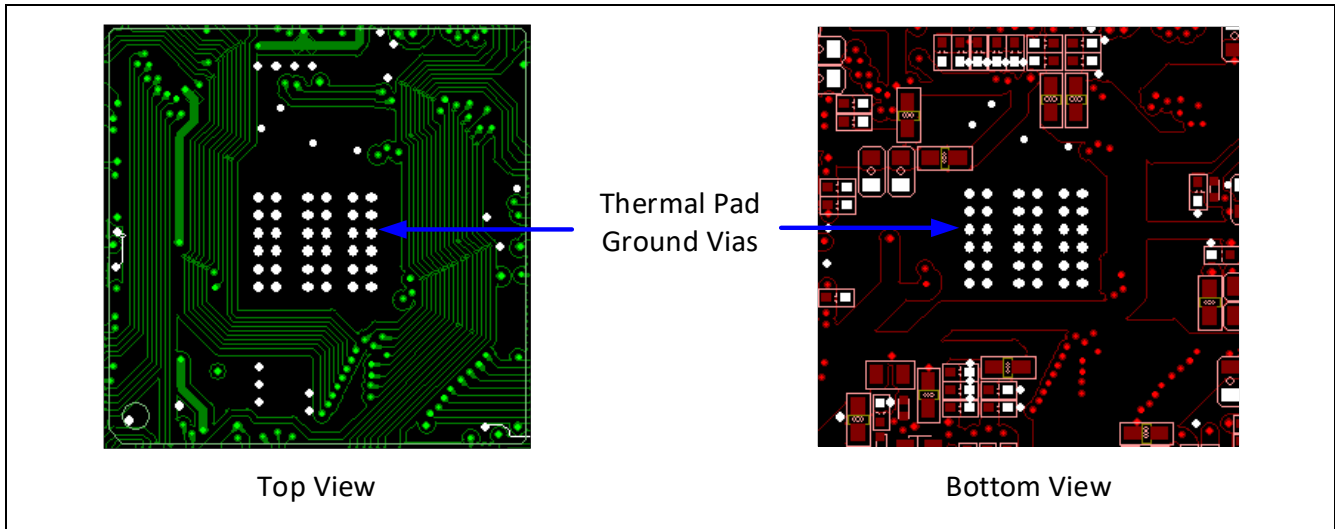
Actual Thermal Pad Vias on PCB Layout
